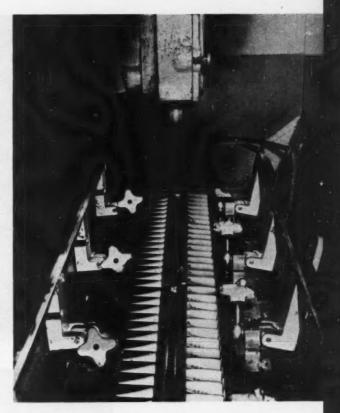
Frame-like doors of this fixture are closed centrally during the actual grinding of the turbine blades.
